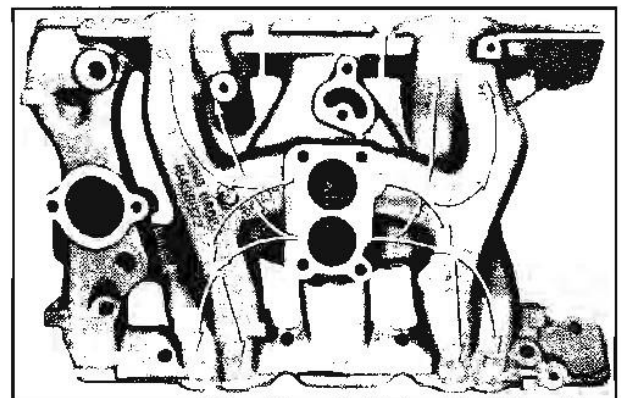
Intake Manifold - Two Barrel Carburetor
